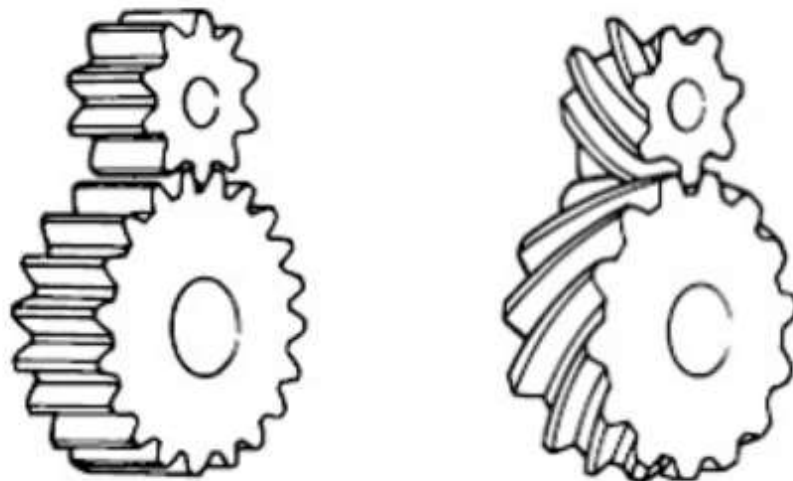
A sketch of spur and helical gears (*Kohara Gear Industry Co. 2015*)
